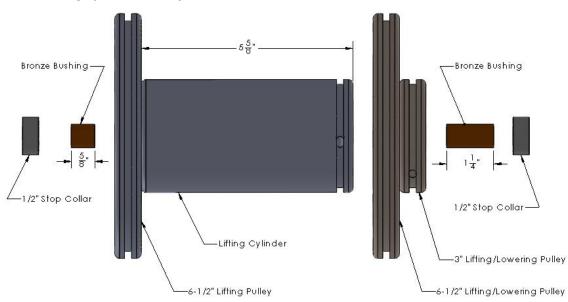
S – Cam-cylinders Configuration for SDL (right side view)
